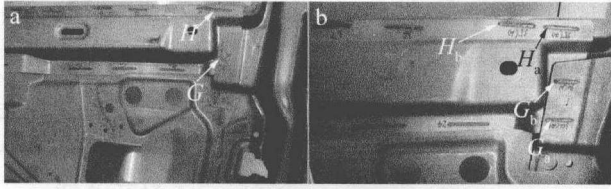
a—before optimization of welding parameters b—after optimization of welding parameters
